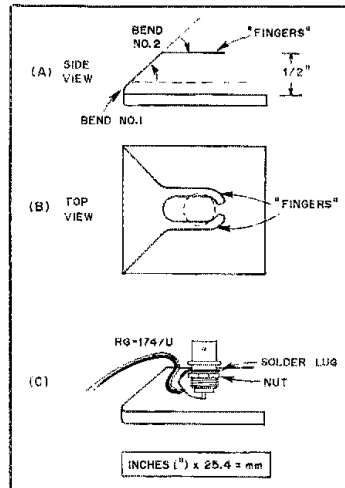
(A) Details showing how the mike holder is bent to form the base of the pocket mag mount. (B) Top view, showing the mike-holder fingers bent to hold the BNC connector. (C) Final assembly of the pocket mag mount.
